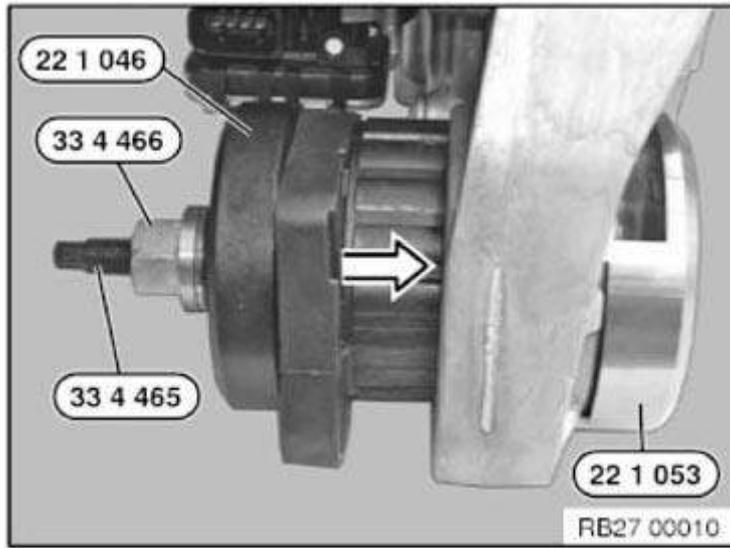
Installing Rubber Mount Using Special Tools (22 1 046)
